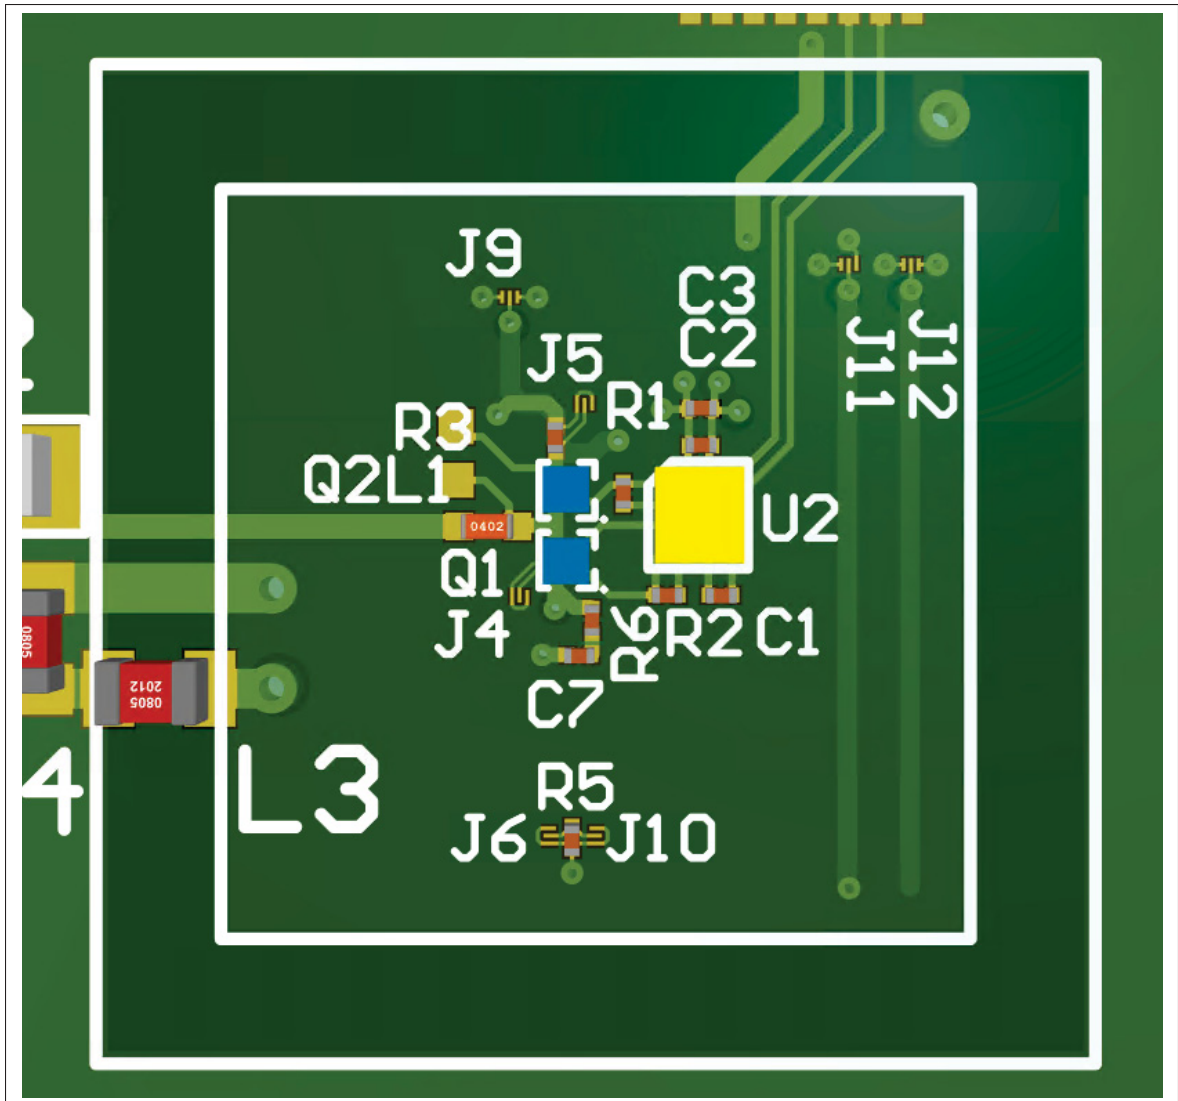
Mechanical layout of the converter section (current measurement technique validation board)
